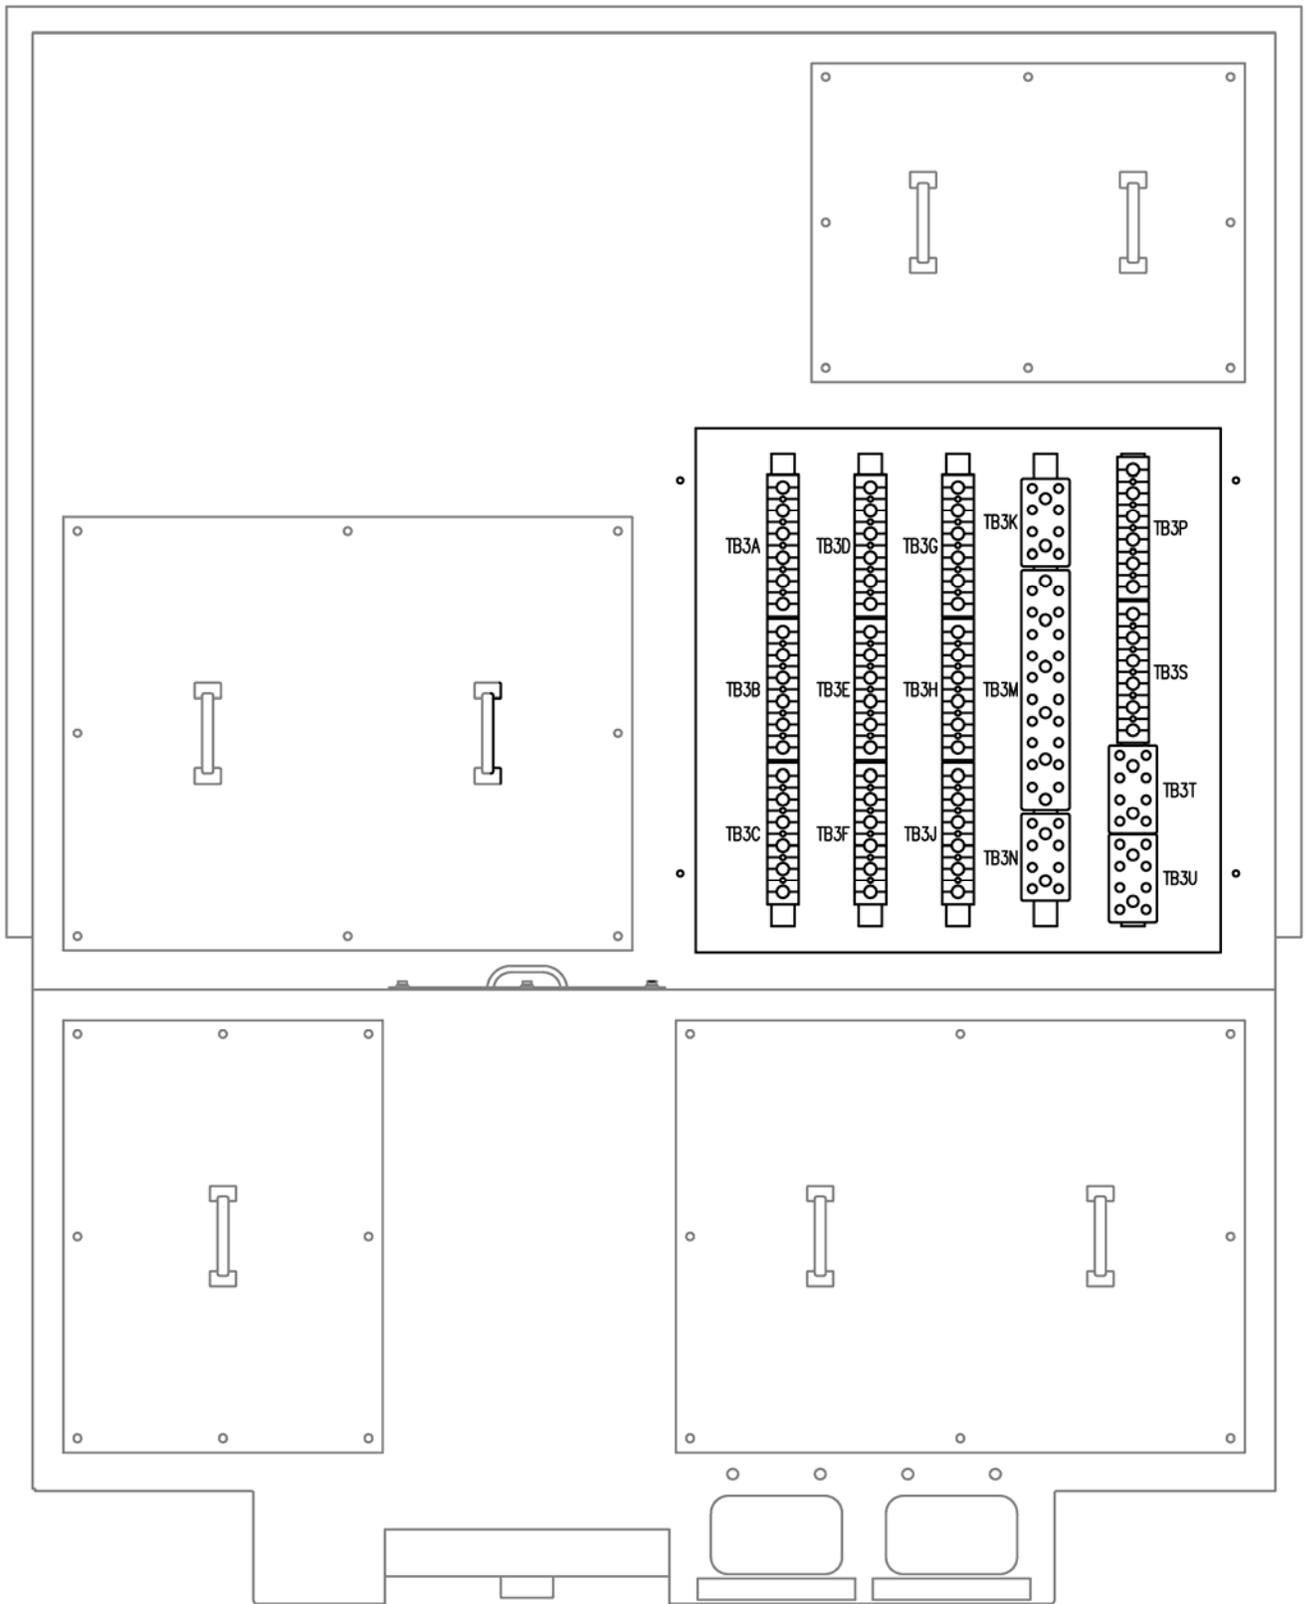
Electrical Cabinet with Terminal Board Cover Removed, Rear View
